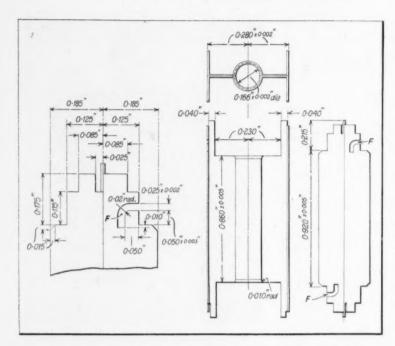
Principal Dimensions and Tolerances the Components Shown in Fig. 2
